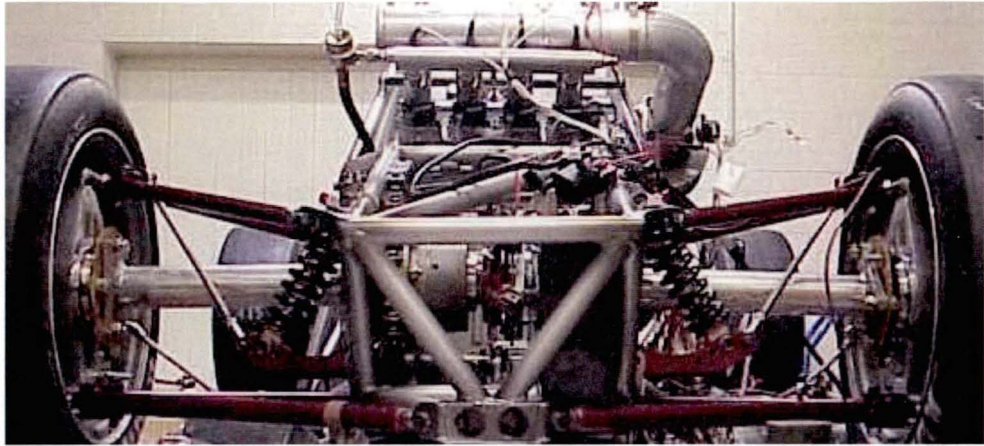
Minimum practical clearances were specified between the seat and engine and also the gearbox and final transmission.
